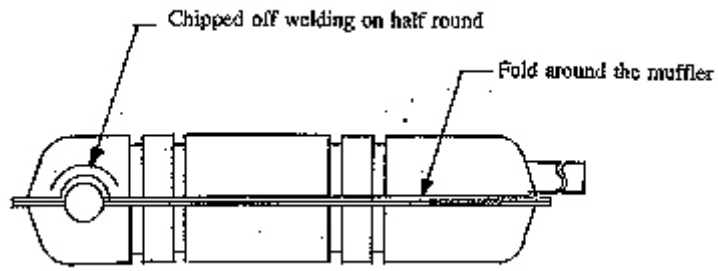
Clip off welding between the rest of exhaust pipe and muffler
